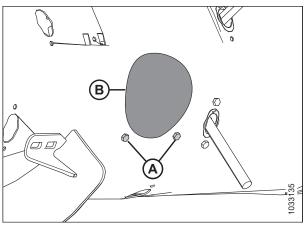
Auger Access Hole Cover – Solid Finger Shown, Hollow Finger is Similar
